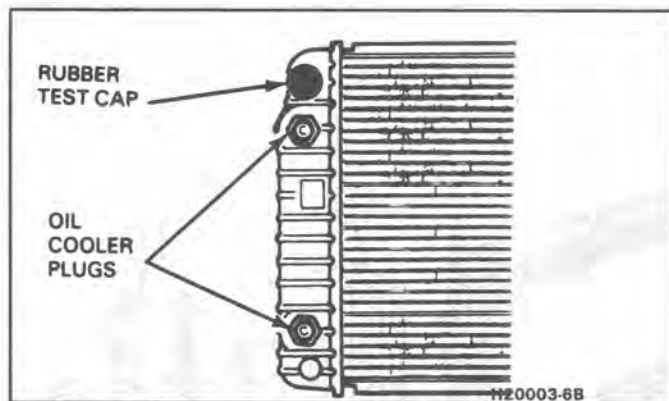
Aluminum Radiator and Oil Cooler Plugs
